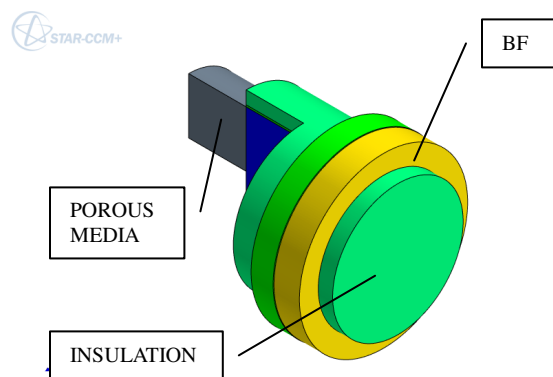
EXPLODED VIEW OF EXCHANGER INTERNALS
